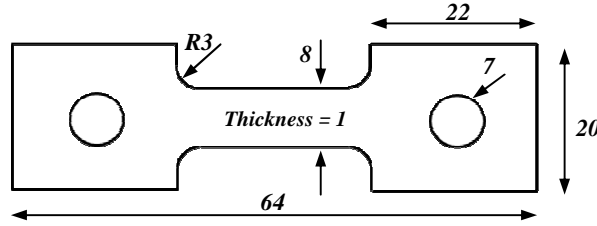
Geometry and dimensions of the tensile specimens (mm).
